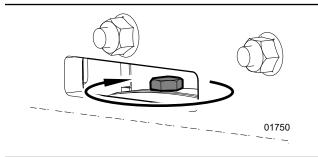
Turn Adjusting Screw Clockwise to Increase Chain Tension
